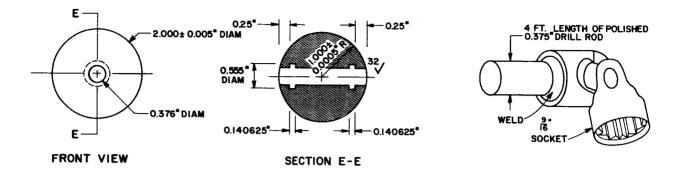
SCHEMATIC ASSEMBLY DRAWING OF RELAXOMETER
